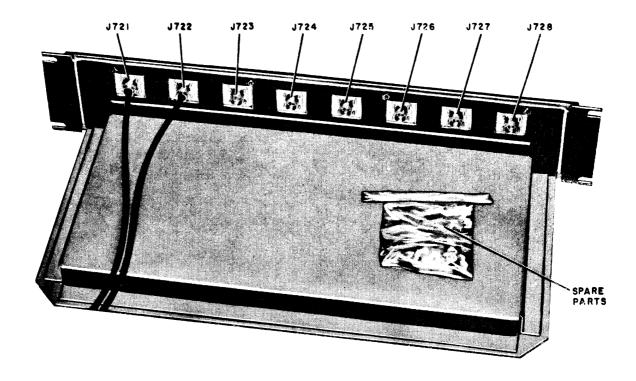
Patch Panel Assembly, Rear View, Location of Parts
